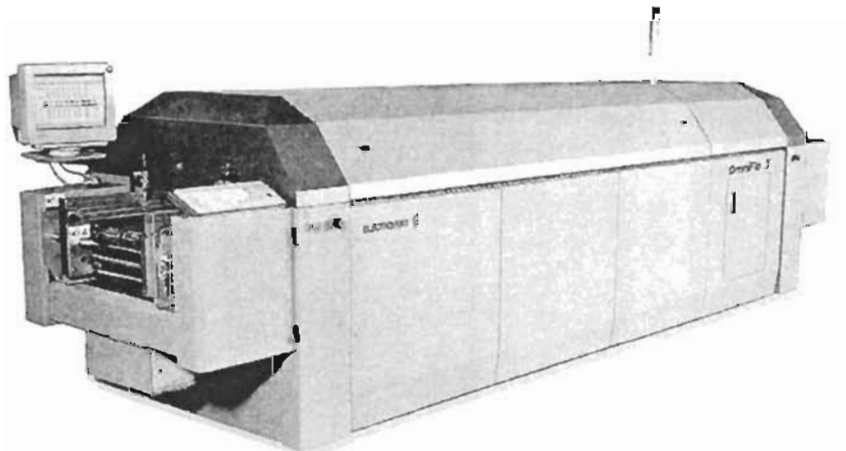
Omniflow forced convection infra-red soldering machine — external view (Speedline Electrovert)
